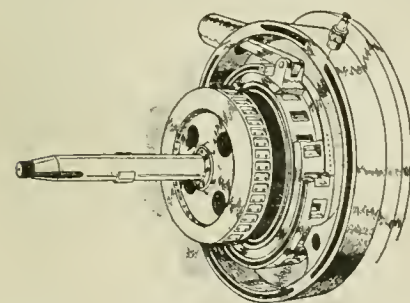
PUPLETT INTERNAL-COMBUSTION TURBINE. PART SECTIONAL VIEW SHOWING THE THREE RINGS OF PORTS AND THE ROTOR
